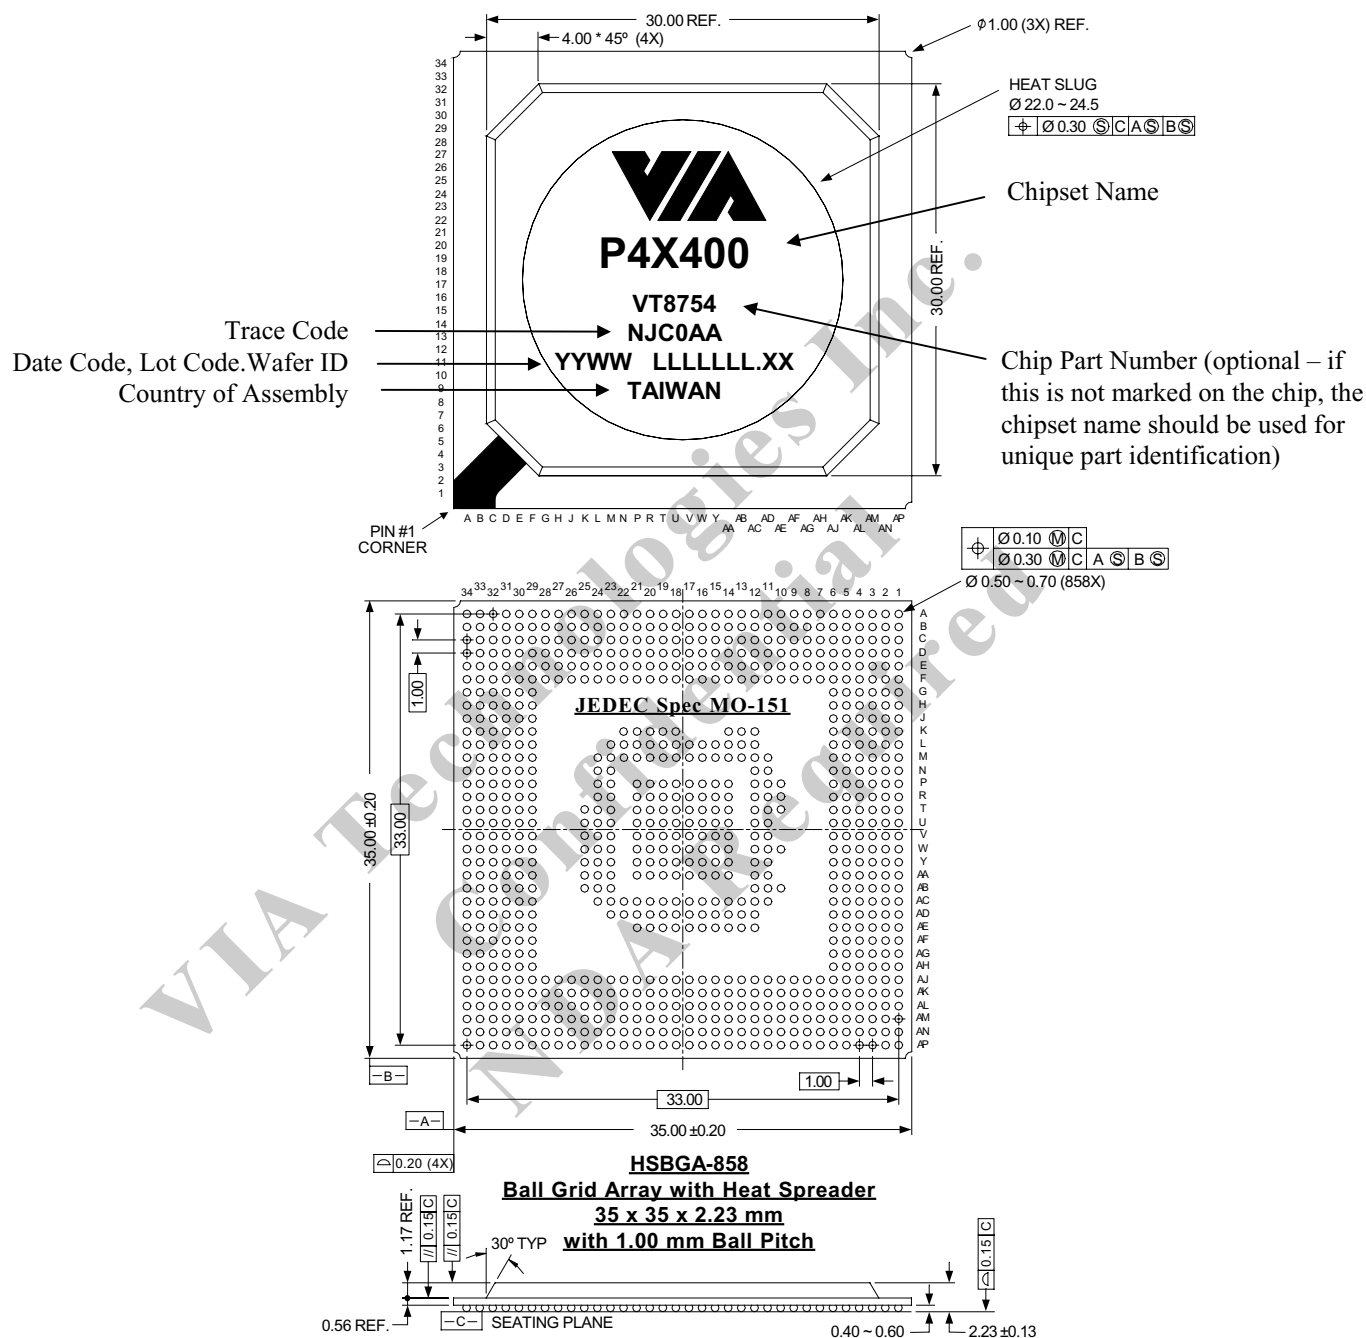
Mechanical Specifications – HSBGA-858 Ball Grid Array Package with Heat Spreader
